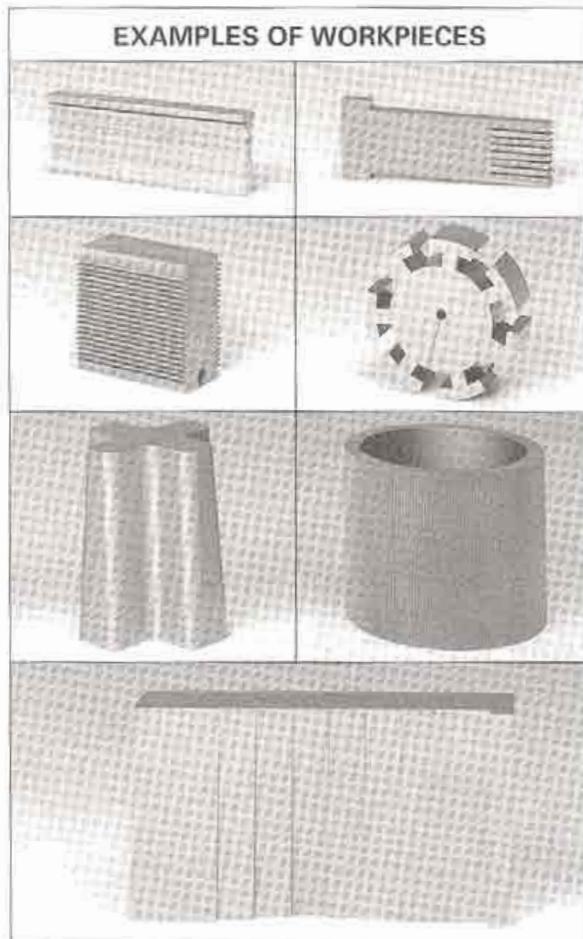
Examples of wire EDM workpieces made on NC machine (Hatachi).
